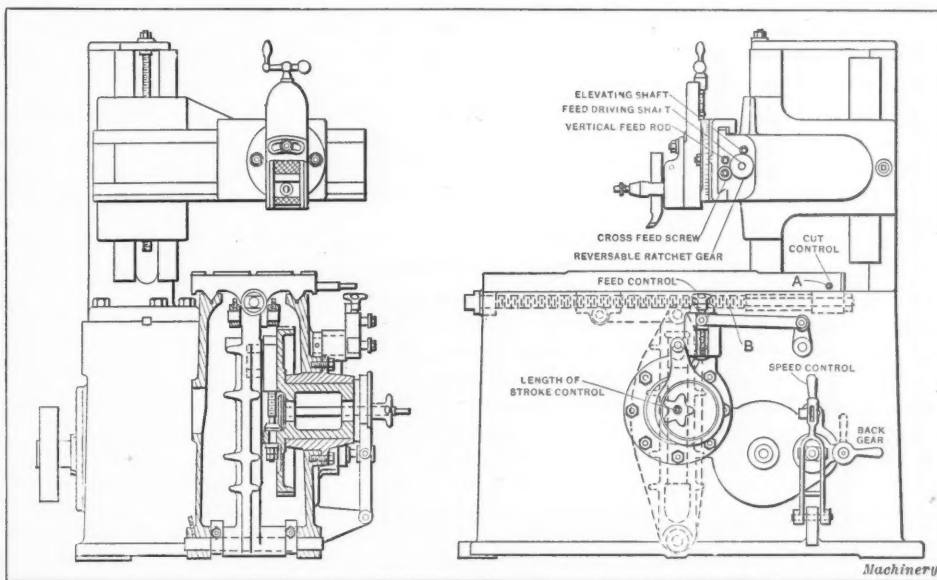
Design of Machine showing Arrangement of Feed Mechanism
